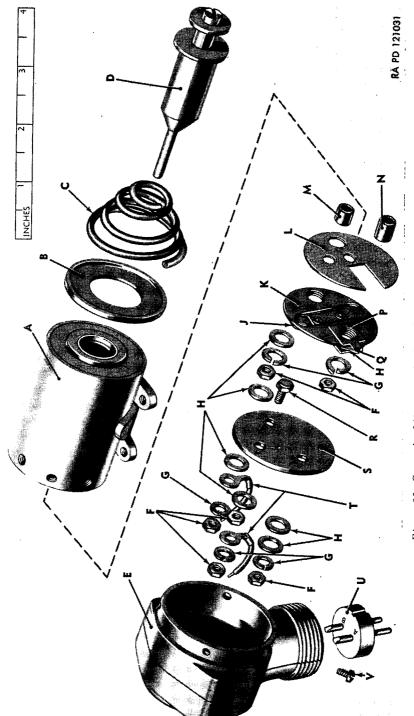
Gunner's shifter control solenoid assembly, exploded view.
